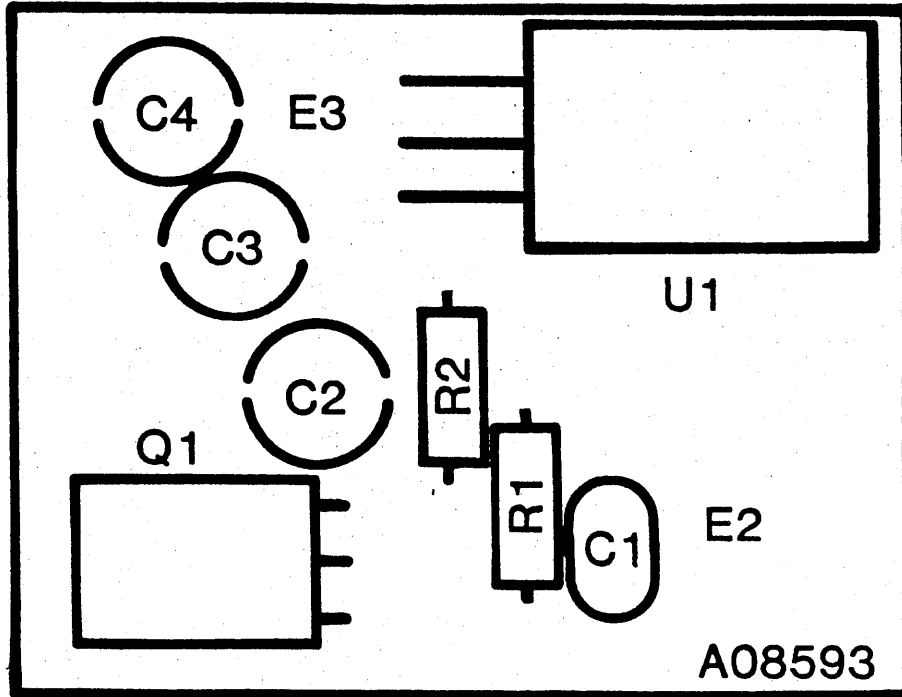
20 Volt Regulator Assembly (A10A2)
